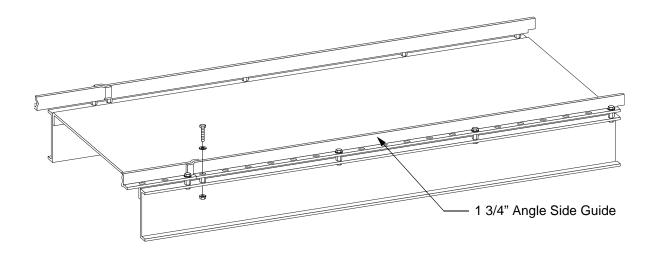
1 3/4" Angle Side Guide, Spaced Mounting
